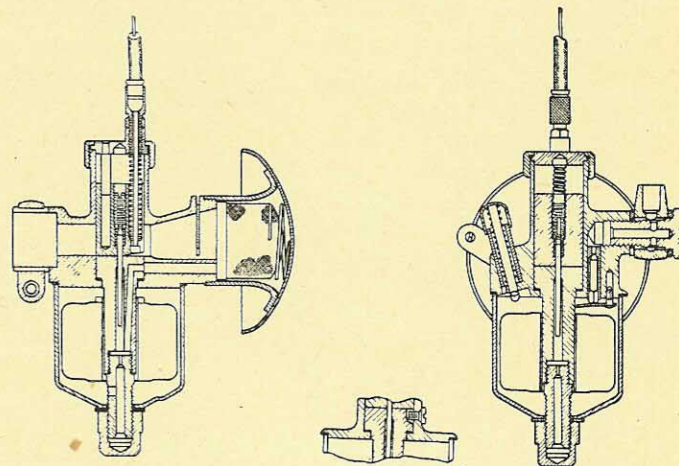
SECTIONAL ARRANGEMENTS OF JUNIOR CARBURETTER.
